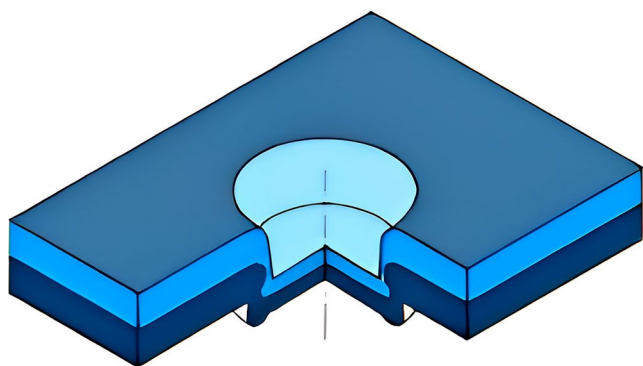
Schematic representation of the tool configuration used for cylindrical clinching joints without auxiliary elements, illustrating the die geometry responsible for forming the mechanical interlocking region
